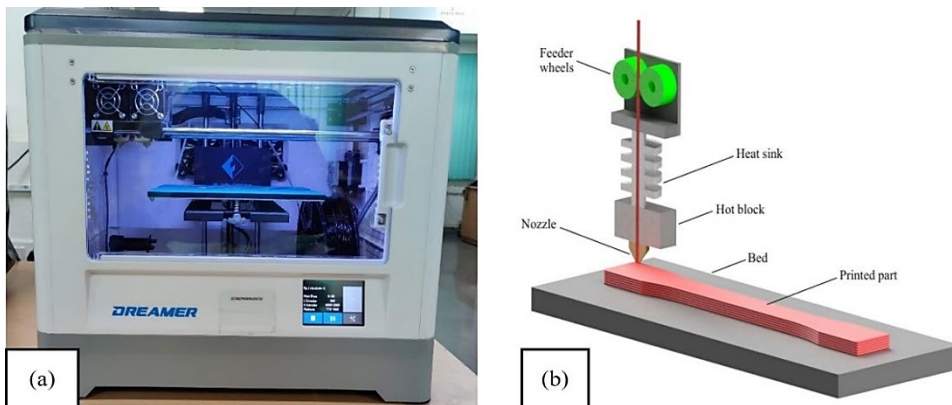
FDM printing: (a) Dreamer printer and (b) working principle
